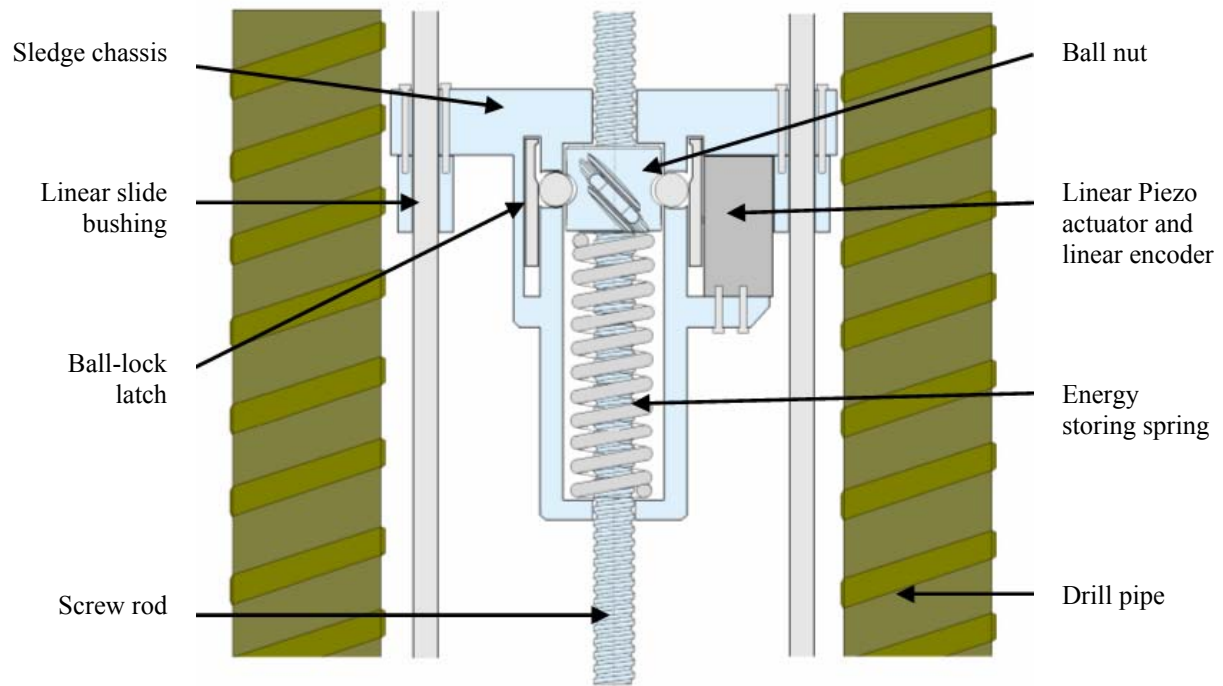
MASA Spindle/sledge design with energy storing spring mechanism. The rotary motor, transmission and spindle are not shown here (Image: MA).
